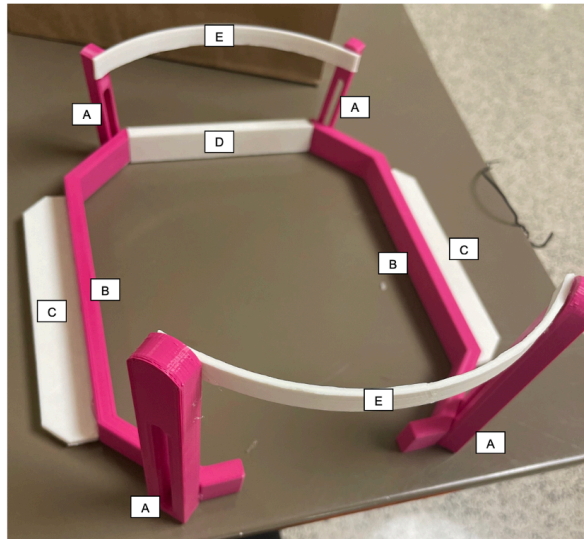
3D-Printed Assembly of Prototype. The final novel device prototype was printed in 11 segments, the four posts (A), the two base pieces (B) and mounting wings (C), the back piece (D), and the two head-braces (E). The pieces were printed on an Ultimaker 3 and S3, using polylactide material in pink and white colors to visualize different parts clearly. The final assembly was joined together using hot glue.
